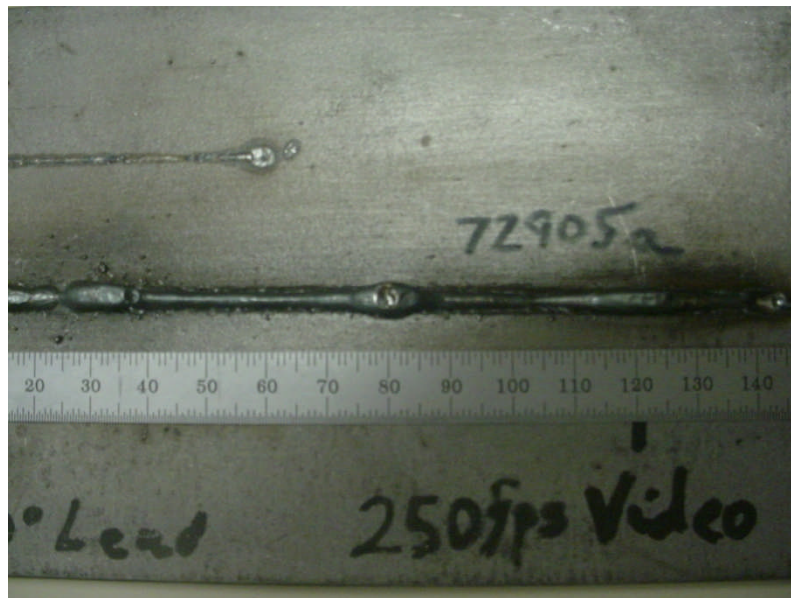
Plan View of GMAW-P BOP Humping and Weld Pool Cavity for Specimen 72905a WFS 15.2 m/min, TS 2.5 m/min, 225 A, 33 V, 16-mm CTWD, 5-mm Plate
